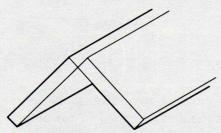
Open corner joint. Most frequently used. Excellent penetration producing a full-strength weld.
